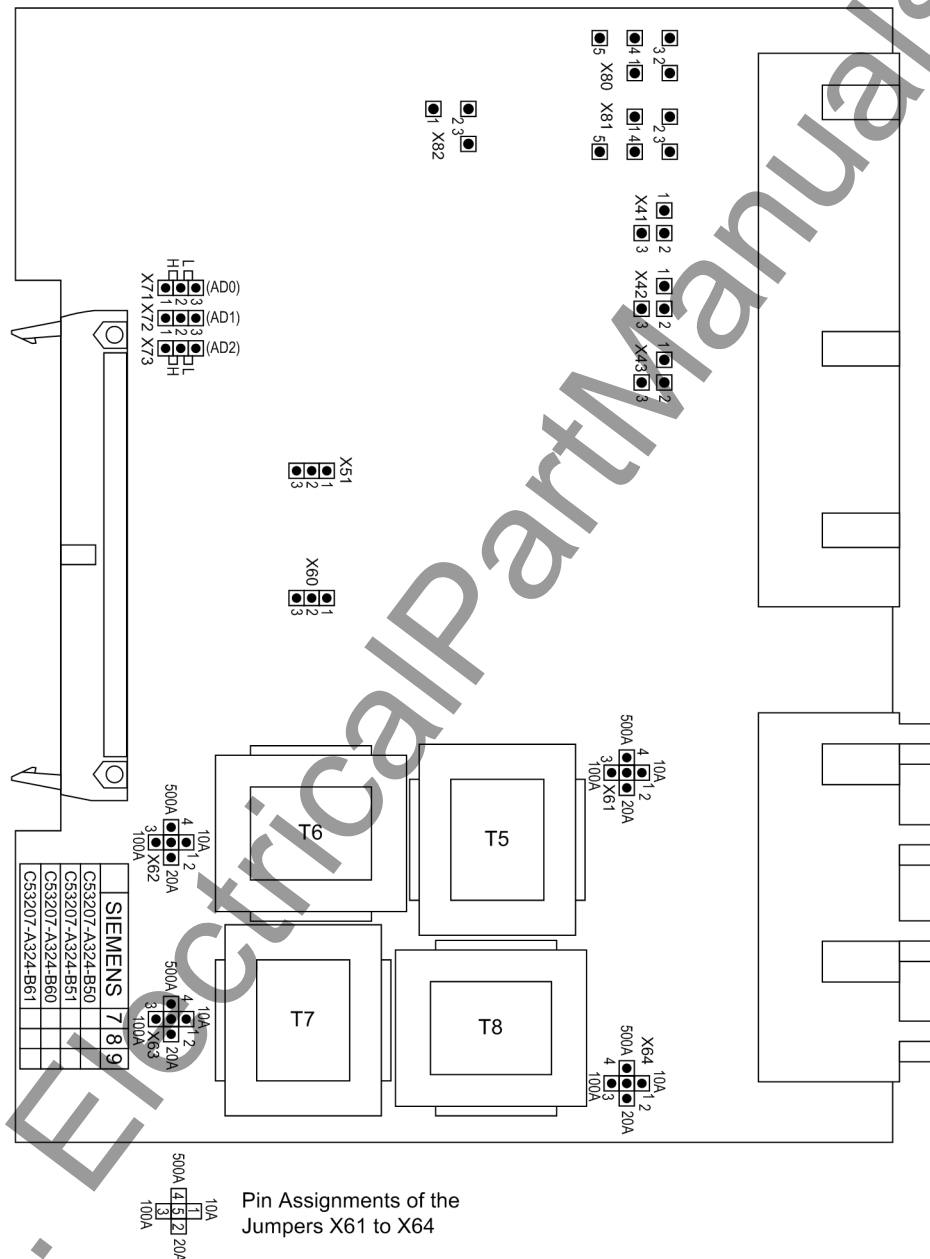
C-I/O-2 input/output board release 7VK61 .../EE or higher, with representation of jumper settings required for checking configuration settings
